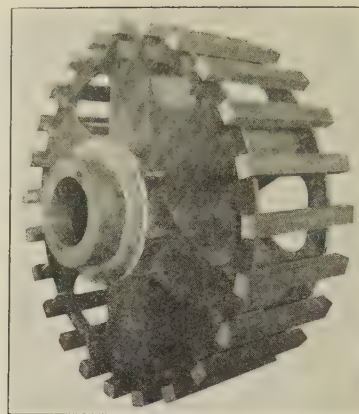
ARMATURE SPIDER FABRICATED BY WELDING
